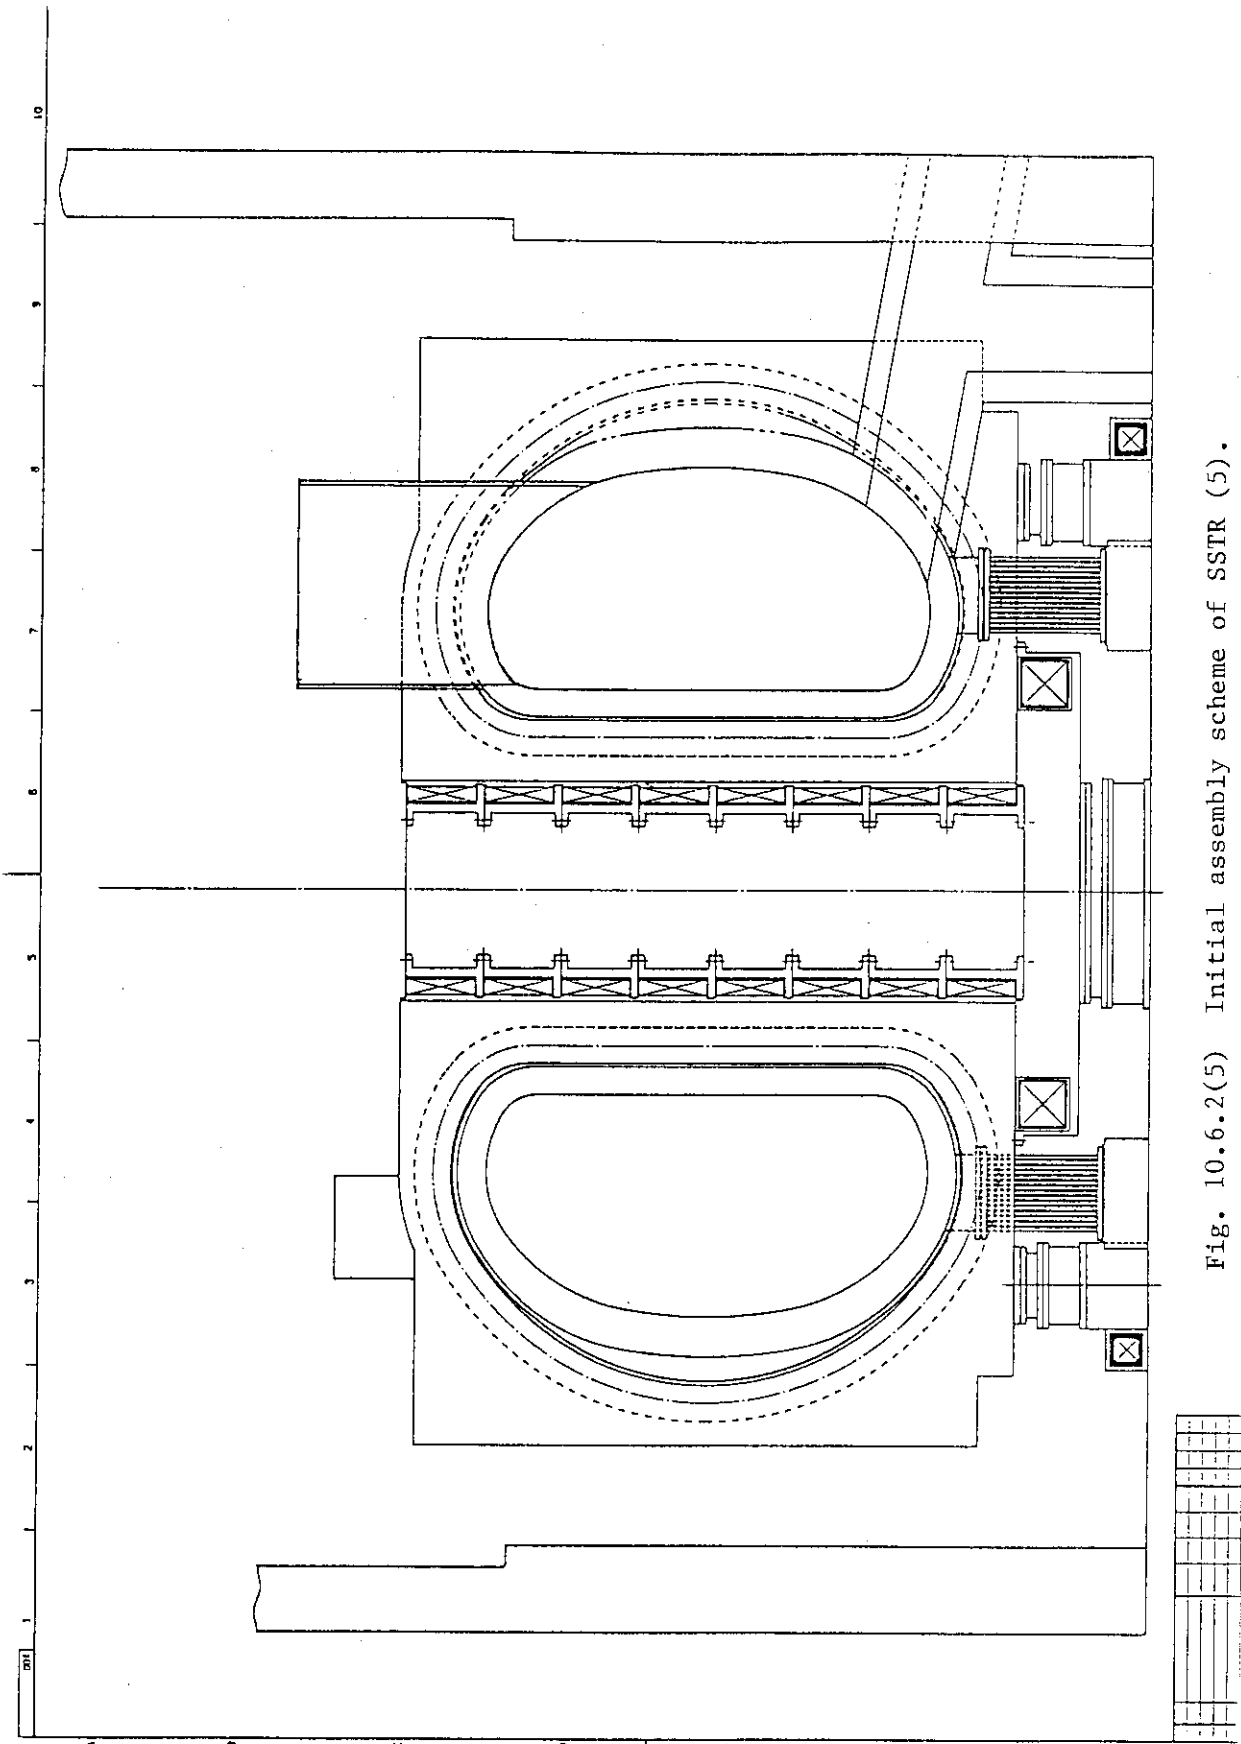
(5) Initial assembly scheme of SSTR (5).
